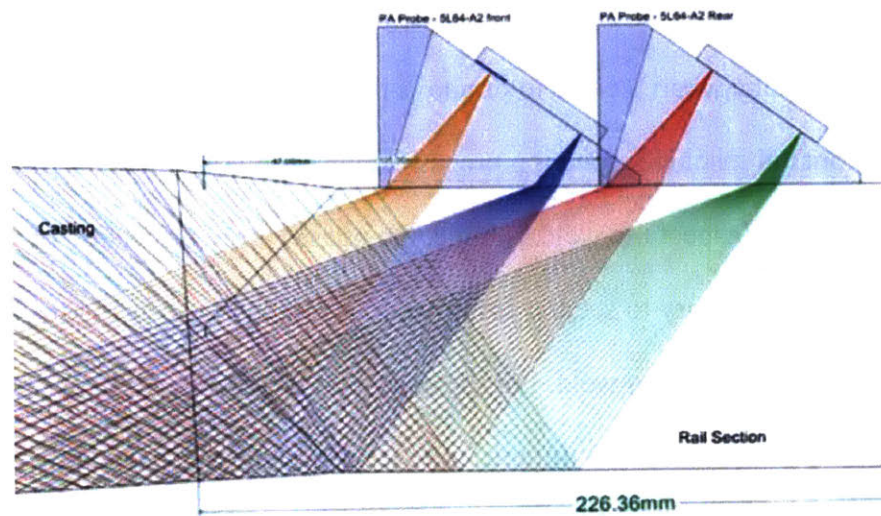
SAMPLE BEAMTOOL SCAN PLAN INSPECTION LAYOUT FOR D11 BUTT WELD
